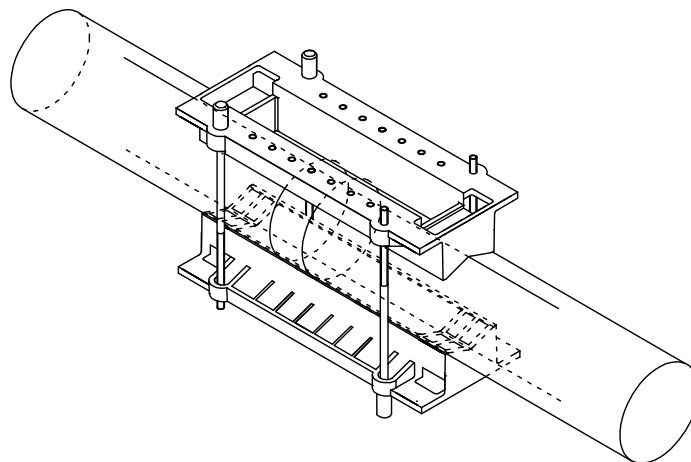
DN50mm or less, Z mounting method (2)
